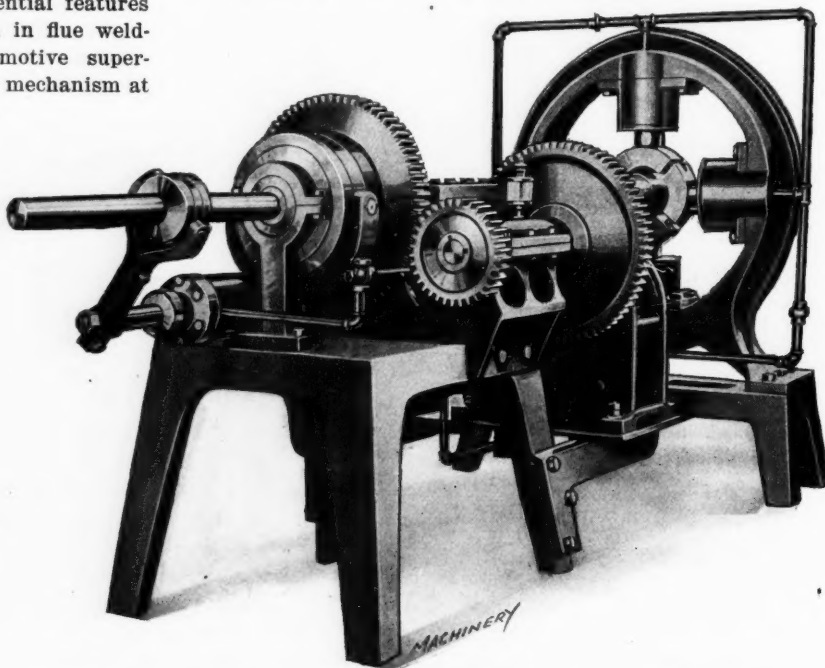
Three-quarter View of Southwark Flue Welder from Opposite End, showing Driving Mechanism
